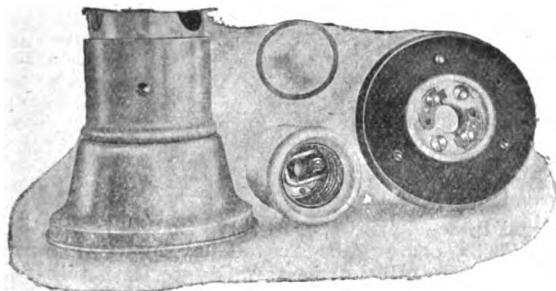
ONE OF THE HOUSINGS DISASSEMBLED.
